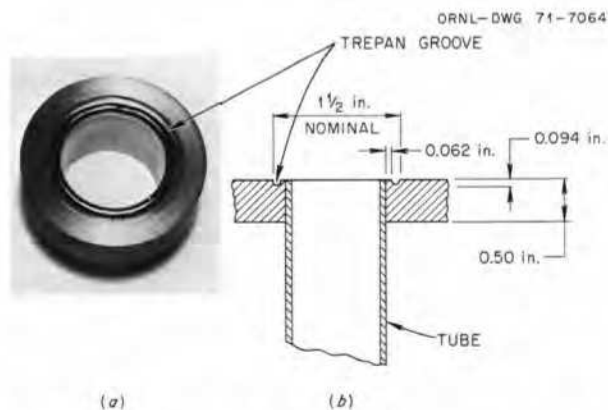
(a) Electron-beam-welded tube-to-header joint ( $1\frac{1}{4}$ -in.-diam, 0.062-in.-wall tube); (b) joint design.
